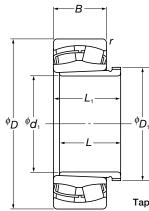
Double Spherical Roller Bearing with Withdrawal Sleeve
